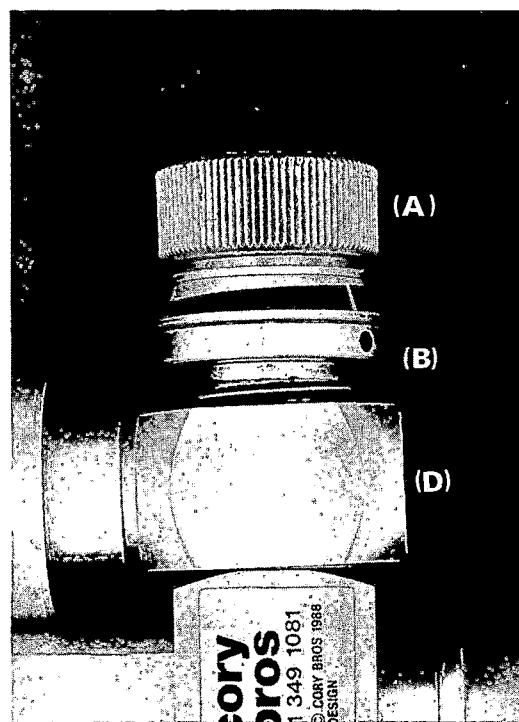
Cross-threaded lock nut holds valve control clear of valve.
